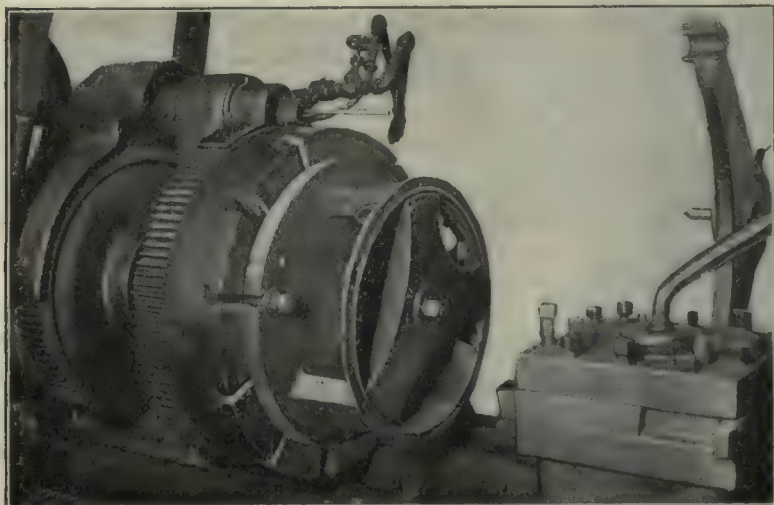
MACHINING THE CLUTCH HOUSING—FIRST OPERATION
